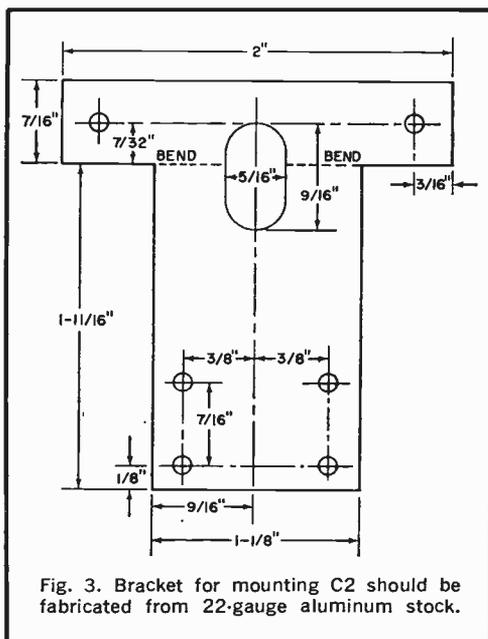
Bracket for mounting *C2* should be fabricated from 22-gauge aluminum stock.
